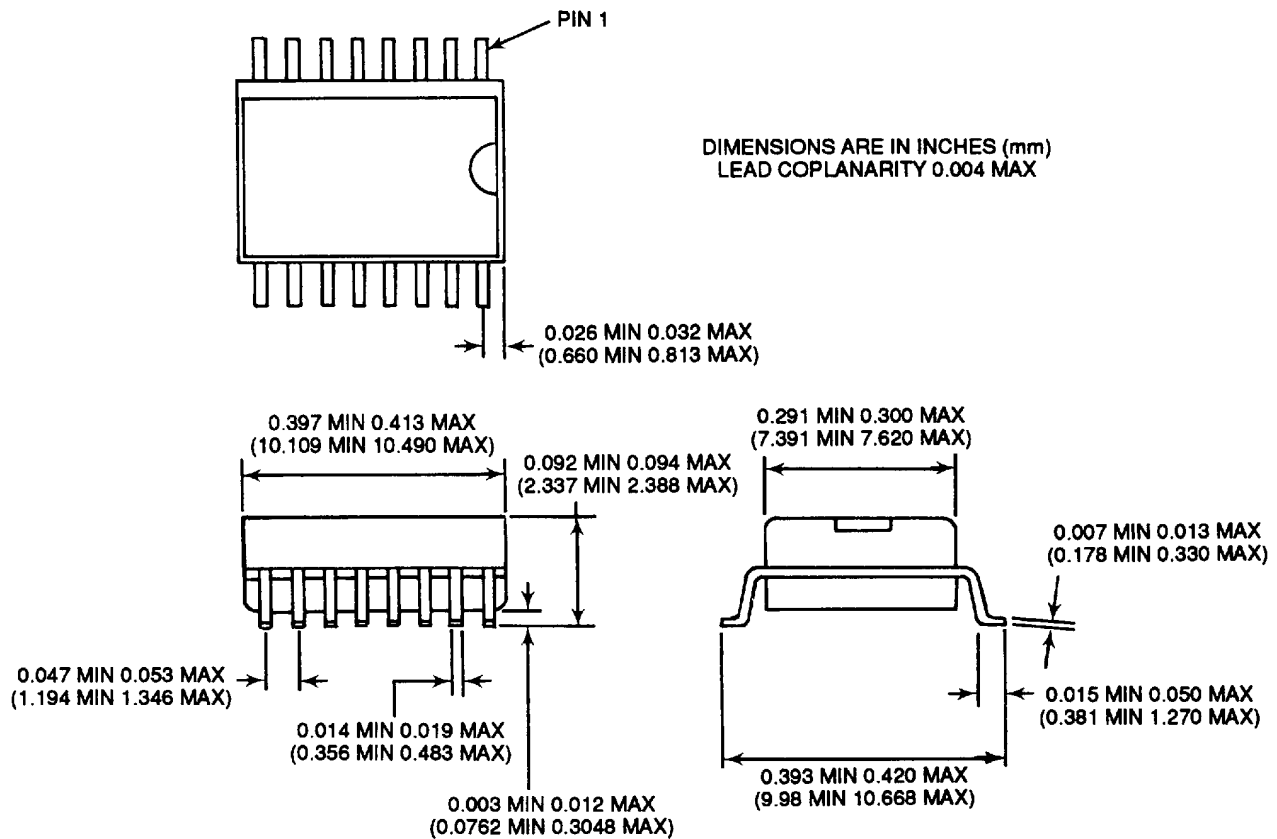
DD-03182GP: SURFACE MOUNT (SOIC) PACKAGE MECHANICAL OUTLINE
